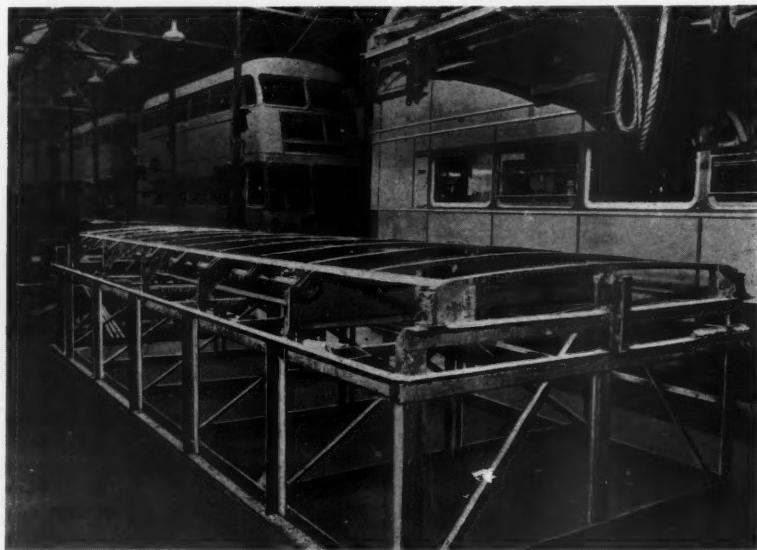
Assembling the intermediate roof at the first station on the upper saloon assembly line.
